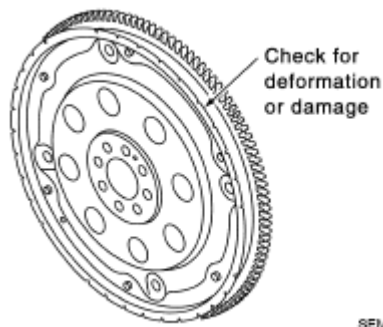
Checking Drive Plate And Signal Plate For Deformation Or Cracks
